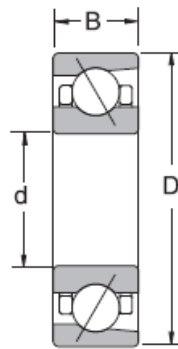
Cross-sectional view of the angular contact ball bearing.
